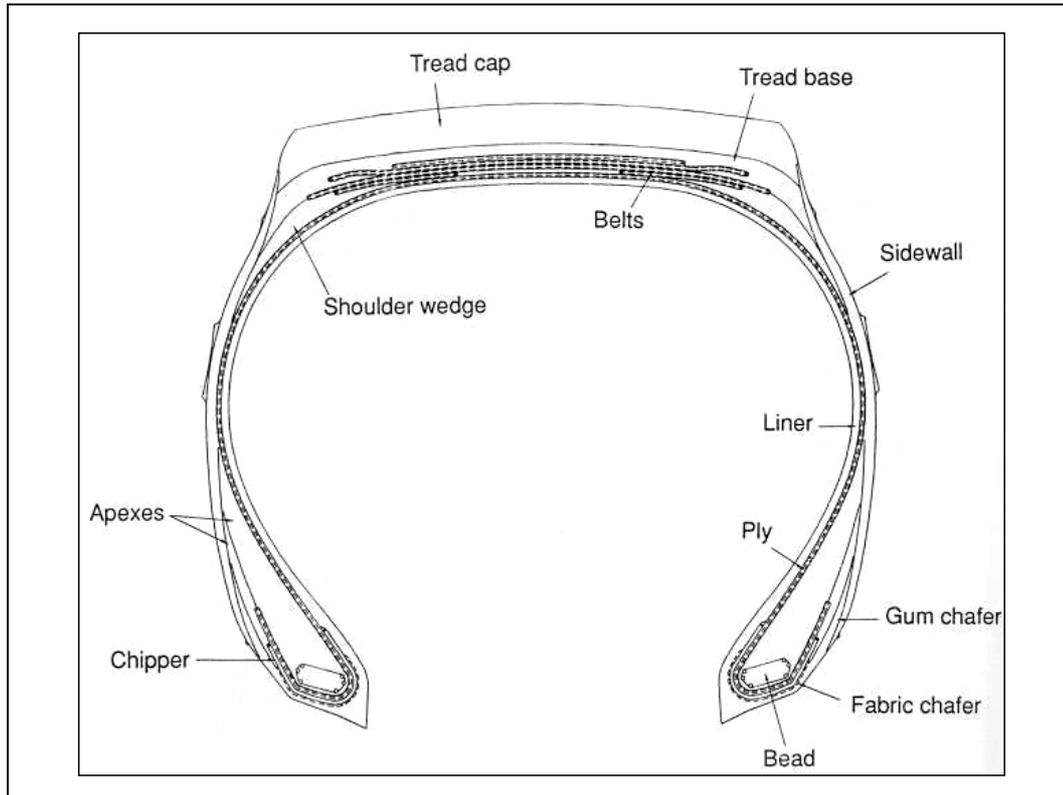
Schematic diagram of a typical truck tyre cross-section
